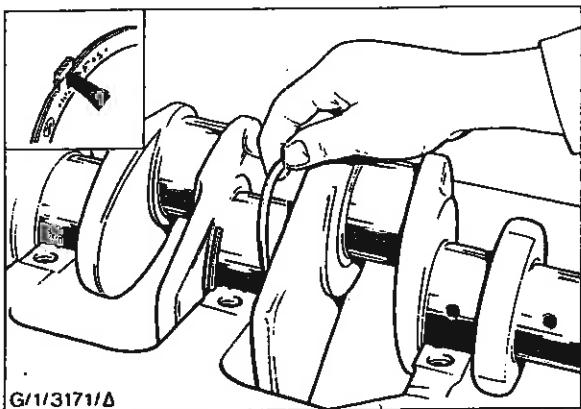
Installing Centre Main Bearing Upper Thrust Washers
